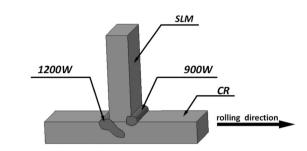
Welding scheme with the indication of 900 W and 1200 W.
